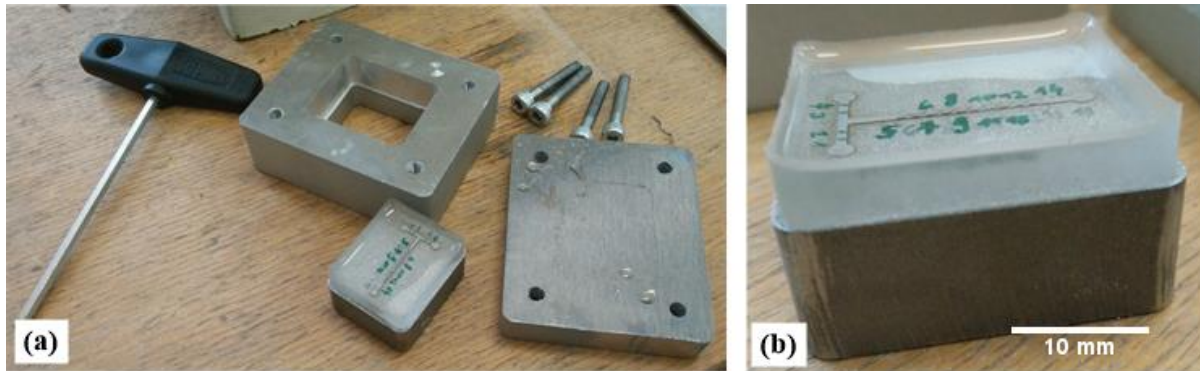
(a) disassembled casting device and tool, (b) cured final product on the tool
